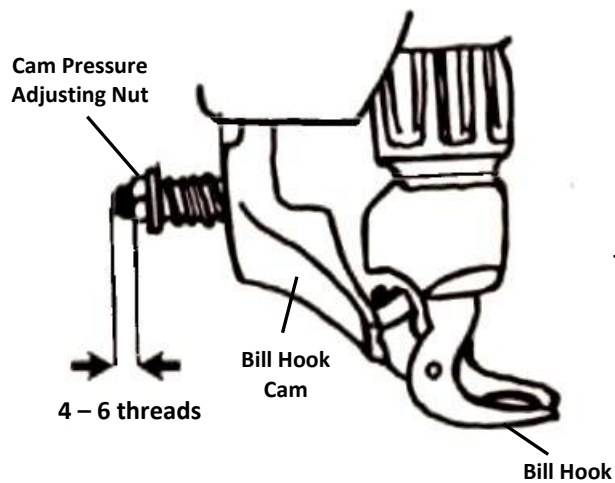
Recommended (*initial*) setting for (*New Holland*) Bill Hook jaw clamping pressure
